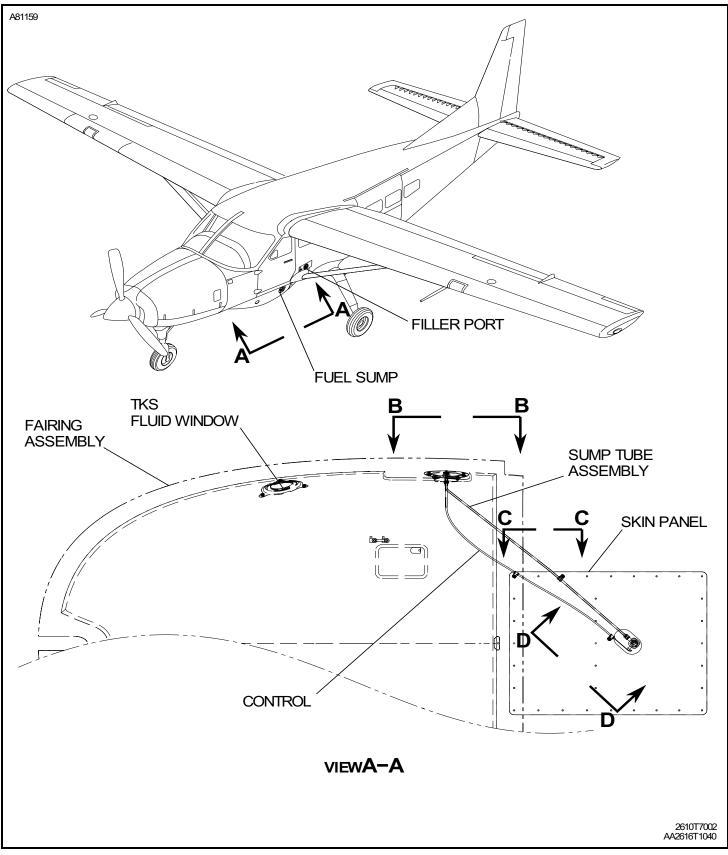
Sheet 1 : TKS Filler and Vent Tube Installation
